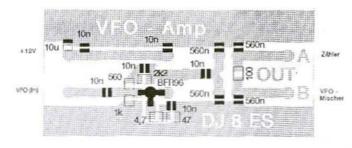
Component Layout with the Surfacemount parts on the track side of thePCB
